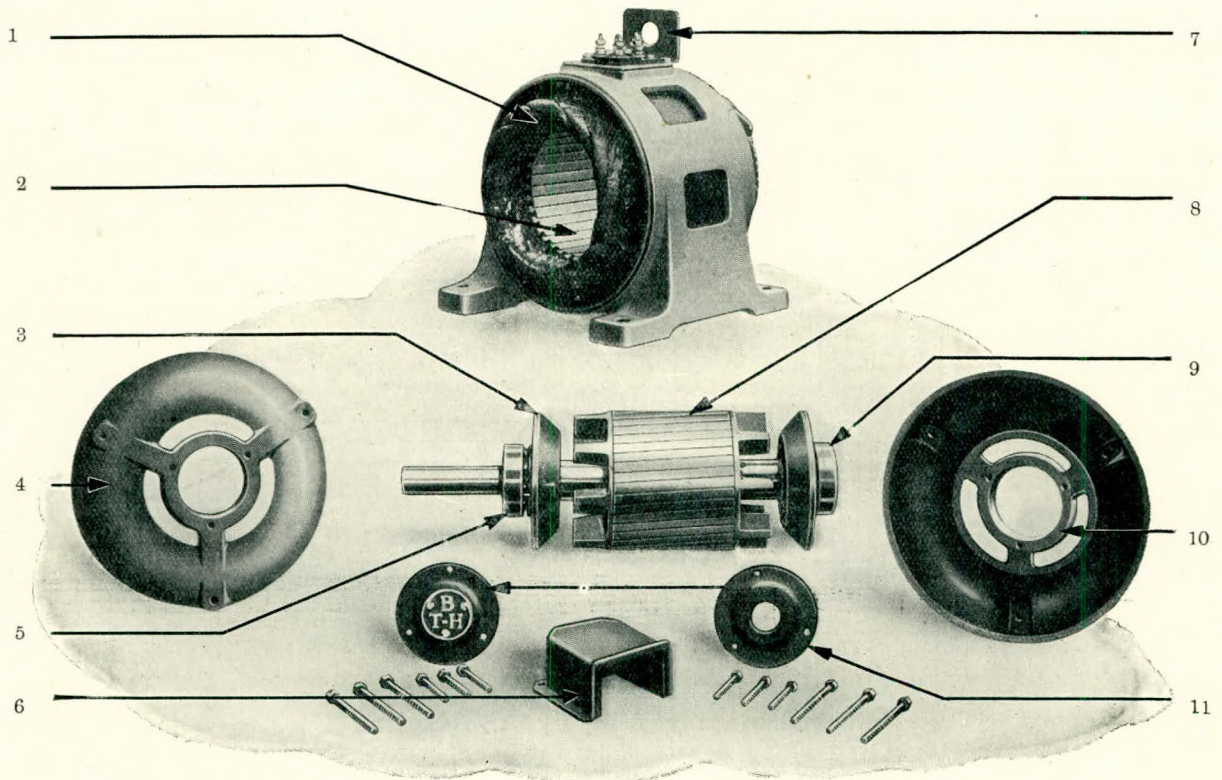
COMPONENT PARTS OF SQUIRREL CAGE INDUCTION MOTOR.
